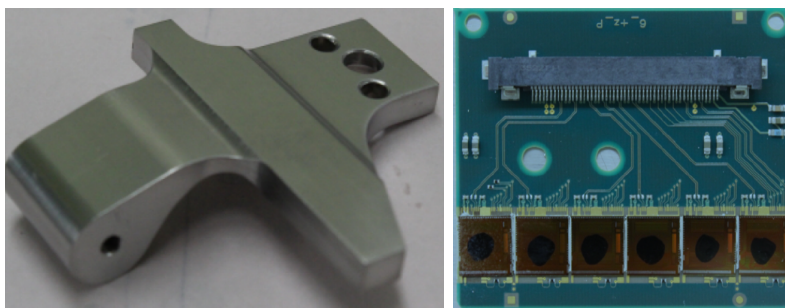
electronics hybrid board (right)and end mount supportor (left) of SVD L6
